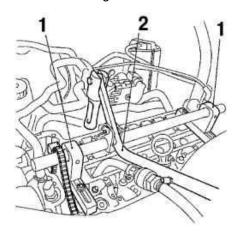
Installation of the lever and the poles to remove the valve springs: 1 - supports 2 - lever
